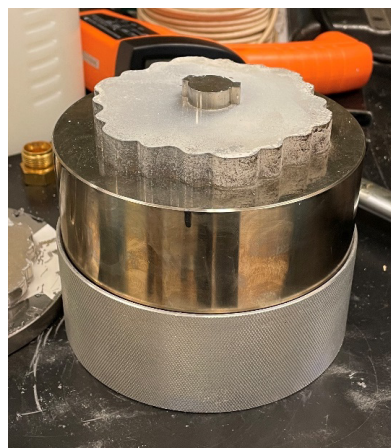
DHAM rotor assembly during removal from custom hot pressing die.
